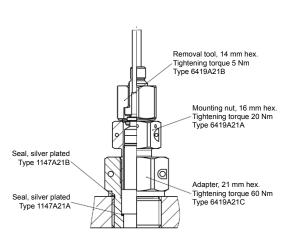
Installation with adapter Type 6419A21C, mounting nut Type 6419A21A, removal tool Type 6419A21B, and seal Type 1147A21A and Type 1147A21B
